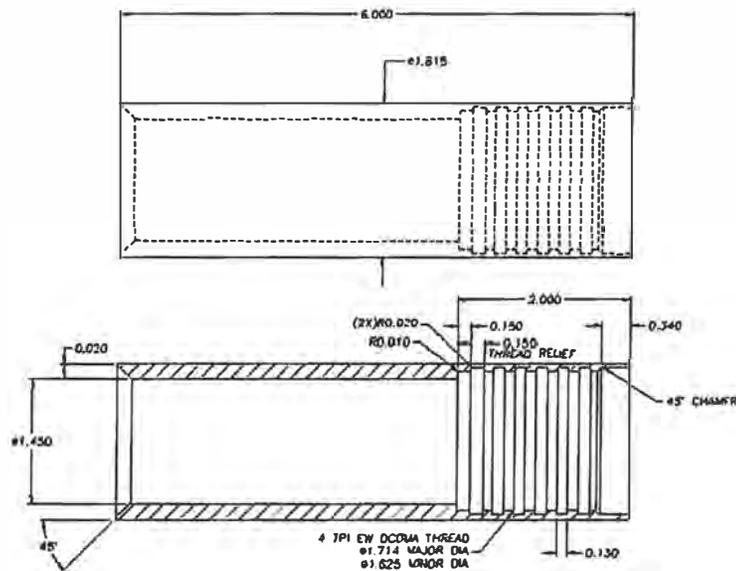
Crowd-In Cutting Shoe with 3.5% Inside Clearance Ratio
